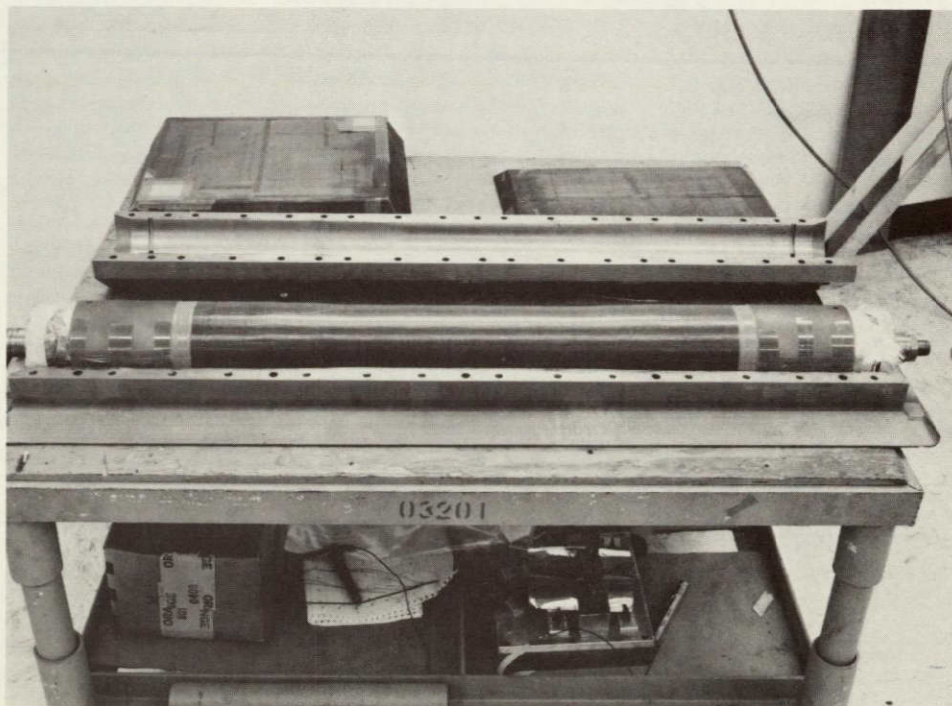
Tube Mold Form with Uncured Tube in Place
